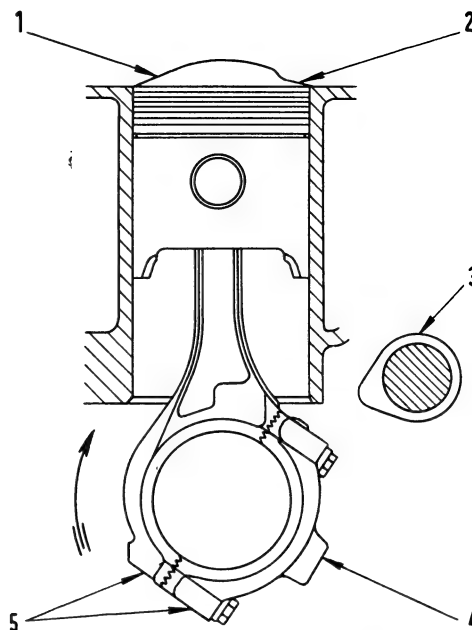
Connecting rod-piston assembly installation diagram. Engine 115 C.005.
